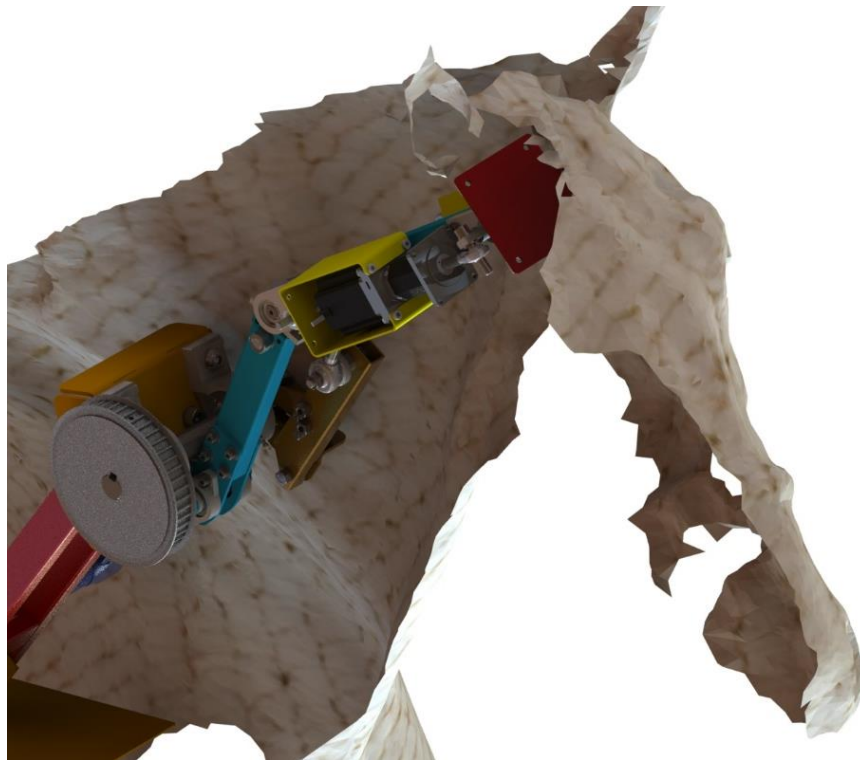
Horse head and neck mechanism combine with horse body CAD model.
